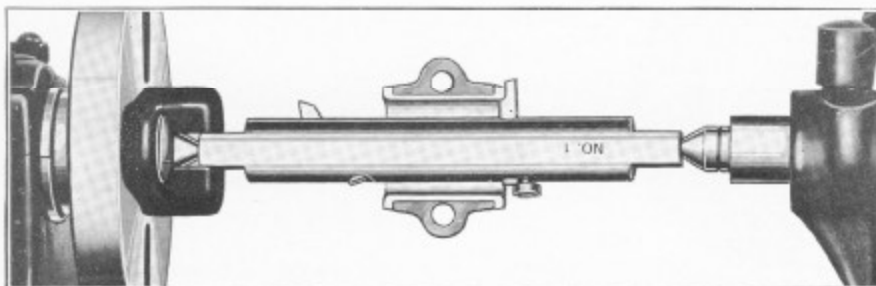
Facing and rounding the end of a connecting rod bearing.
